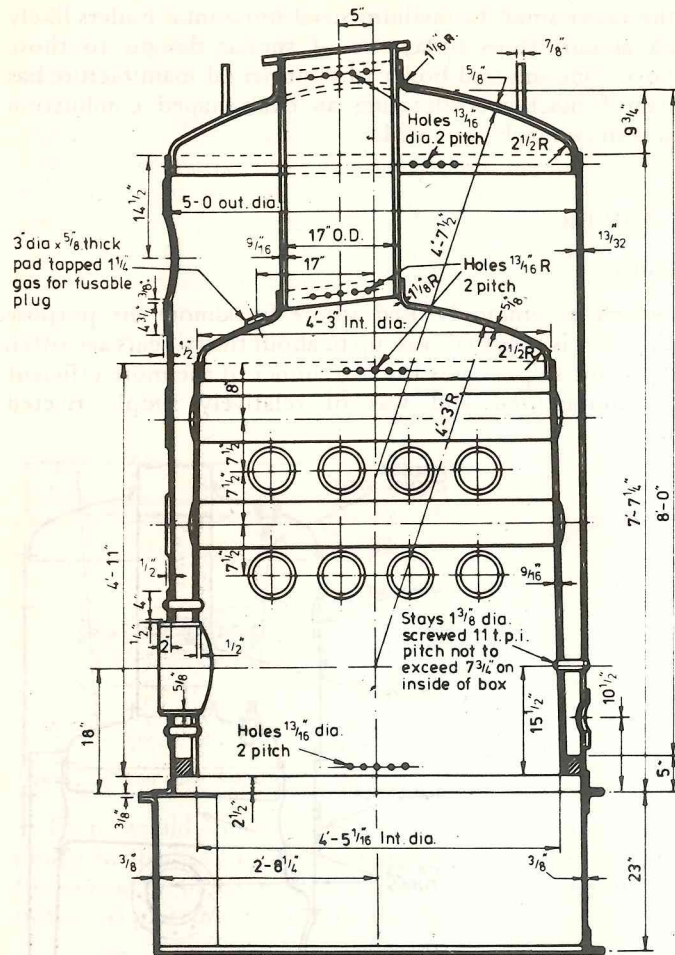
Cross-tube boiler manufactured by Charles D. Holmes & Co. Ltd
